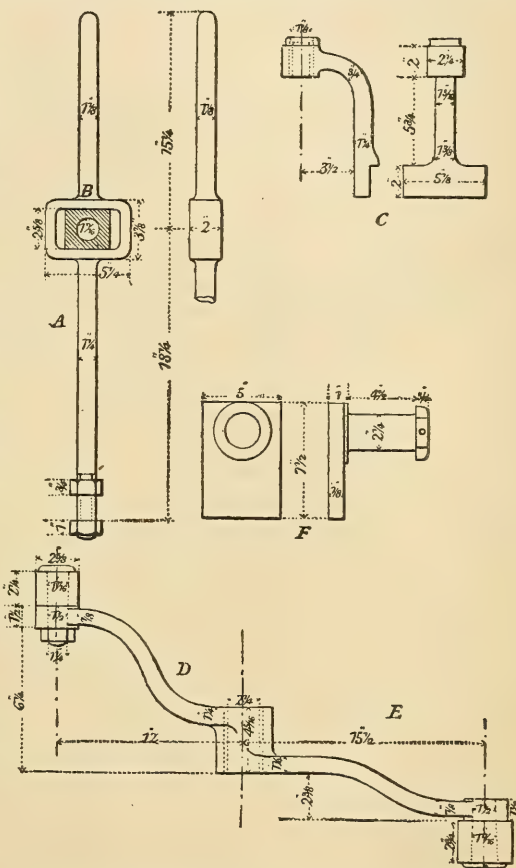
Valve Rod and Guide. Rocking Levers and Stud.
